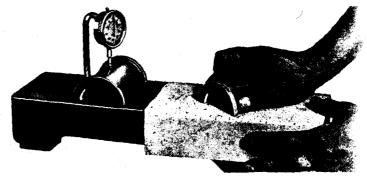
Gauge 71969 Used as a Surface Plate in Fitting Main Bearings
